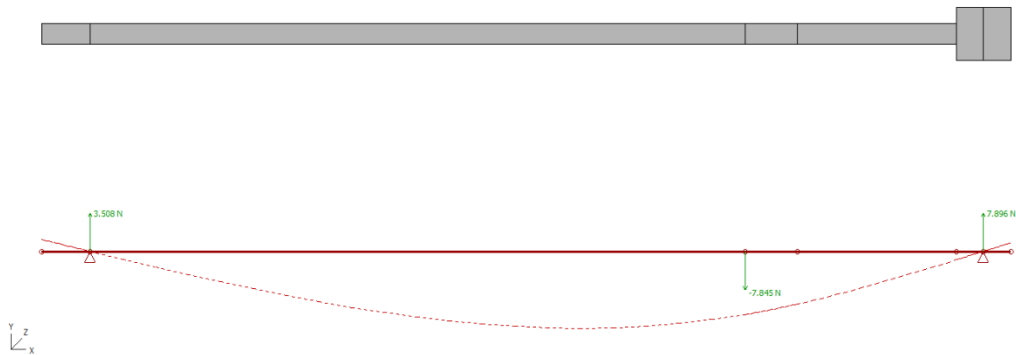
Shaft Alignment: Modeling of the single-loaded shaft
